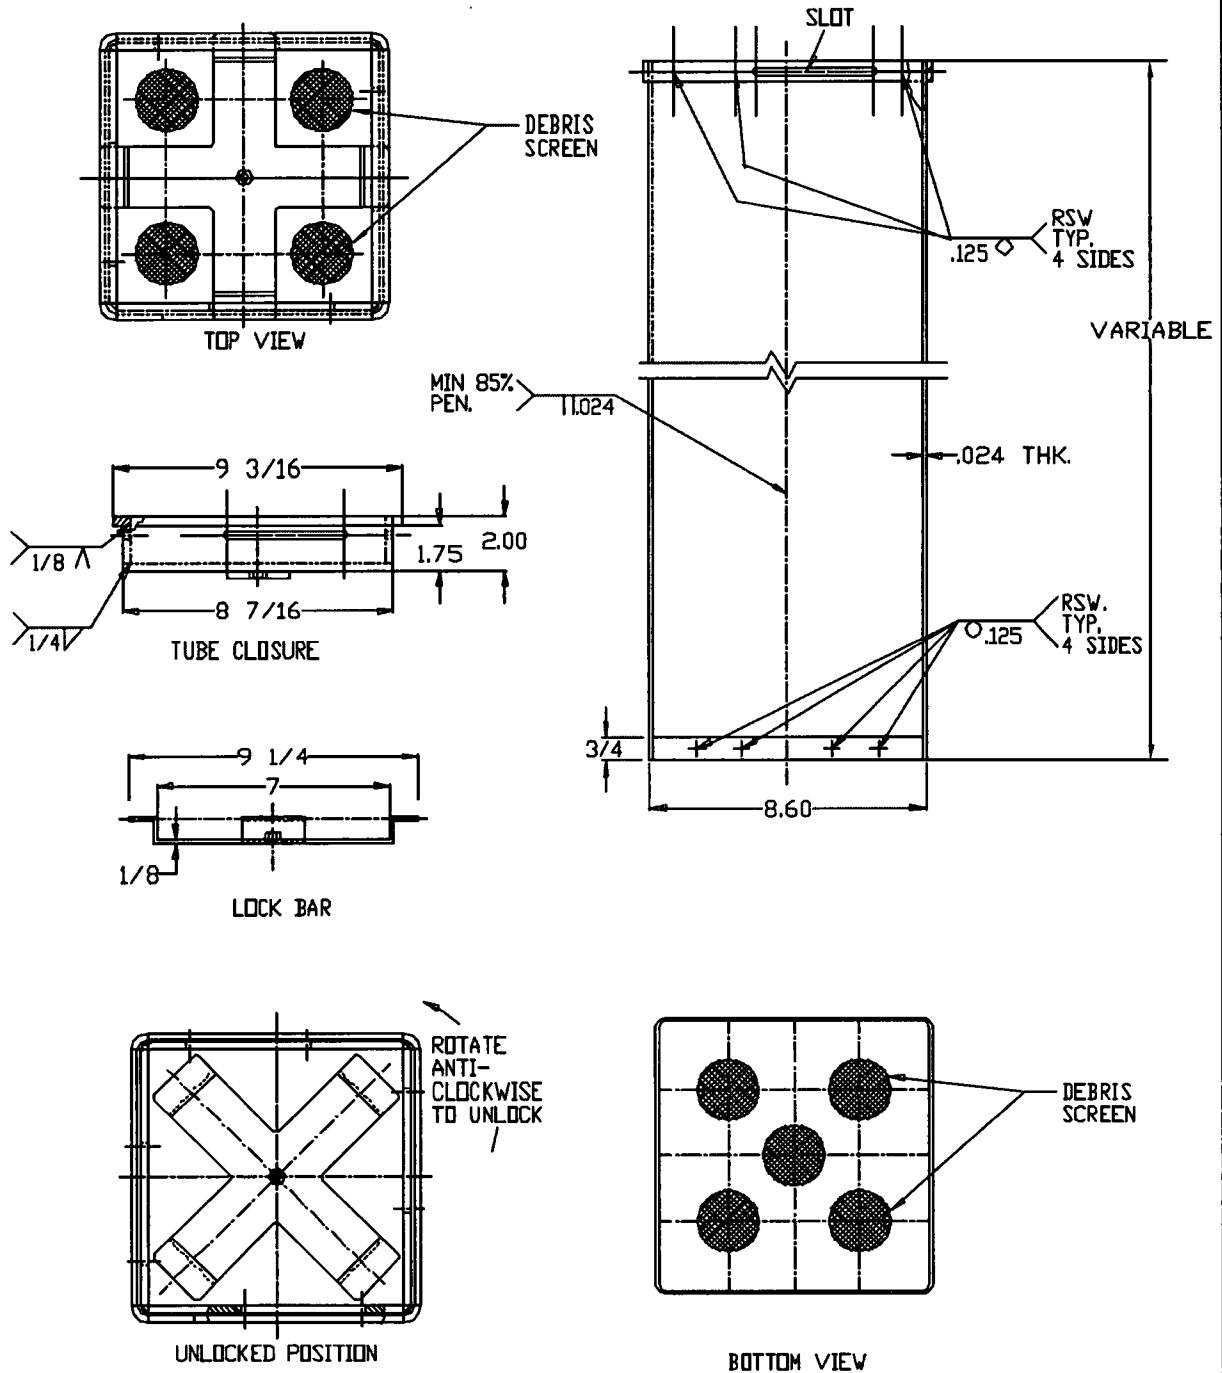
D; HOLTEC DAMAGED FUEL CONTAINER FOR PWR SNF IN MPC-32/32F
